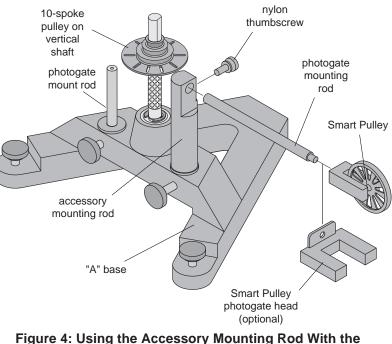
Using the Accessory Mounting Rod With the Photogate Mounting Rod and/or Smart Pulley
